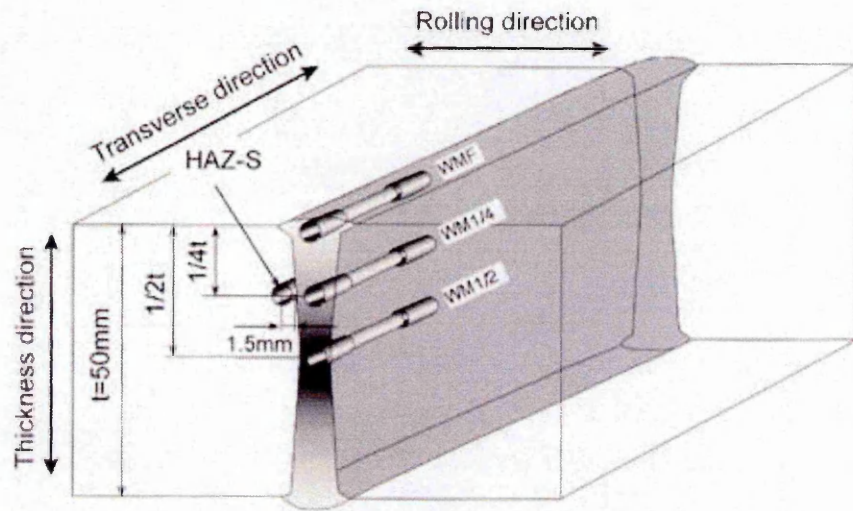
Location of sampling for miniature specimen in the welded joint [18]
